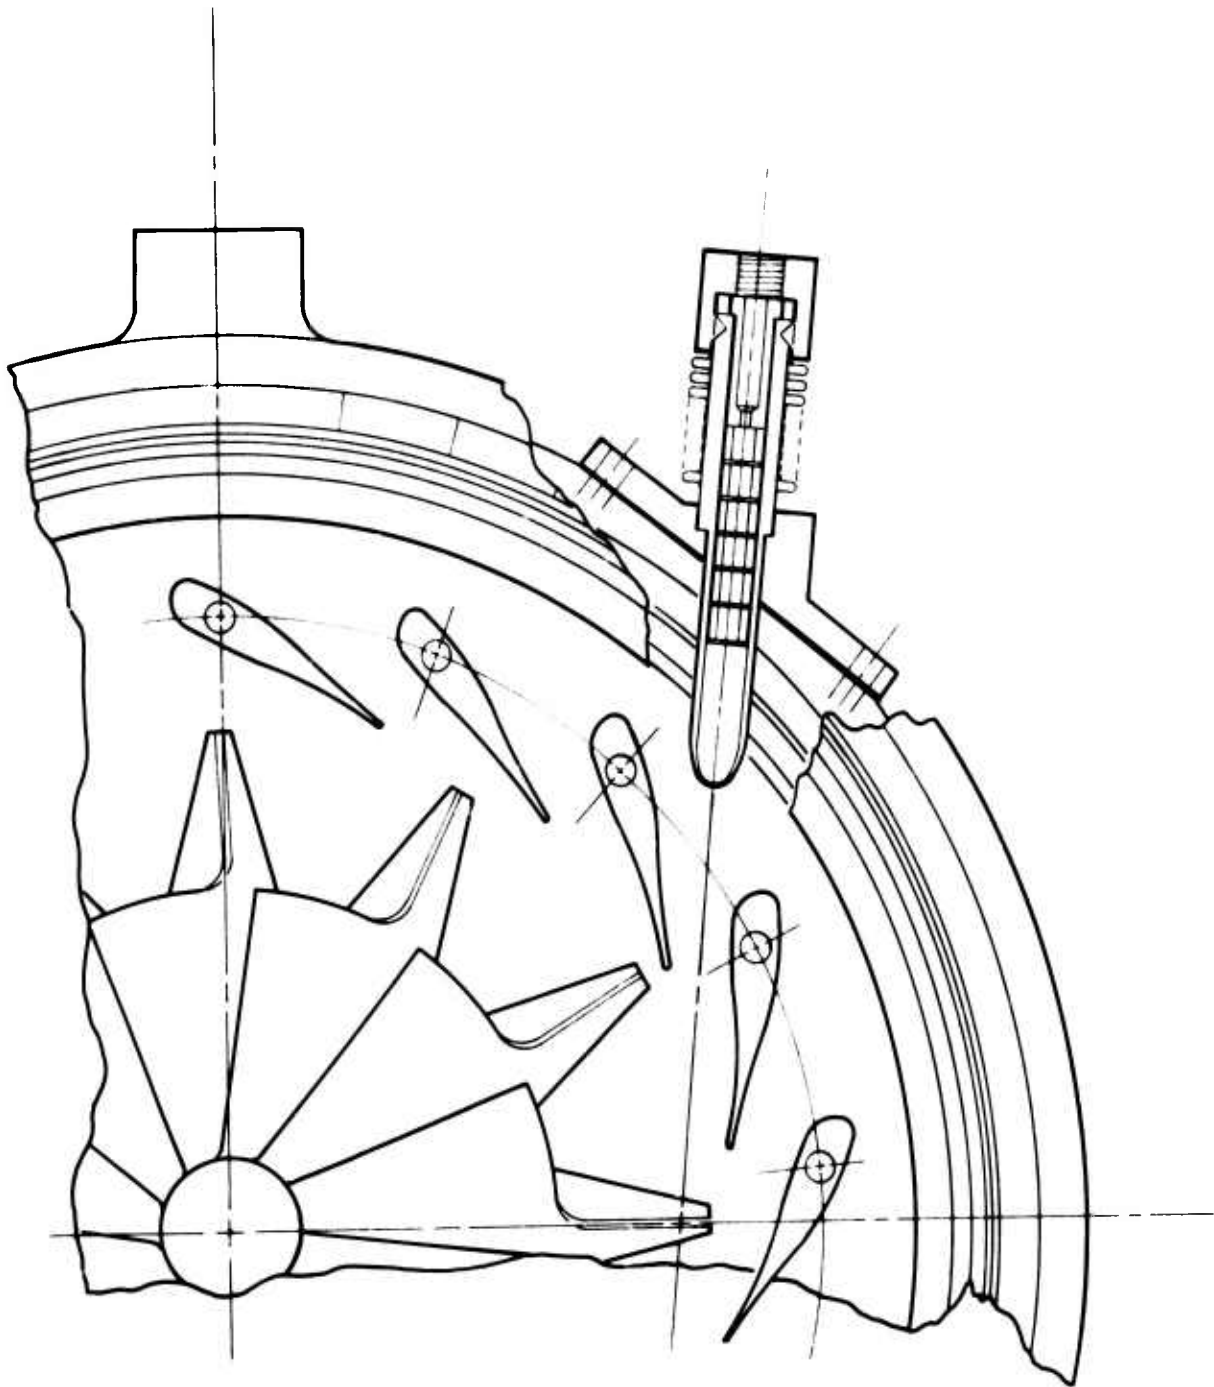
T62T-32 Cross-Section Showing Aperture Sensor Installation.
